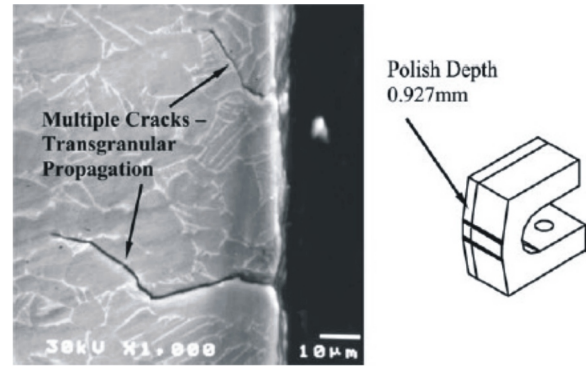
Fretting crack profile produced on the C-specimen. [22]
